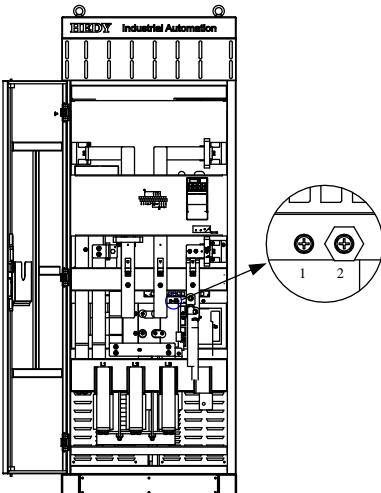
Fit and remove the internal EMC filter (Size L)
